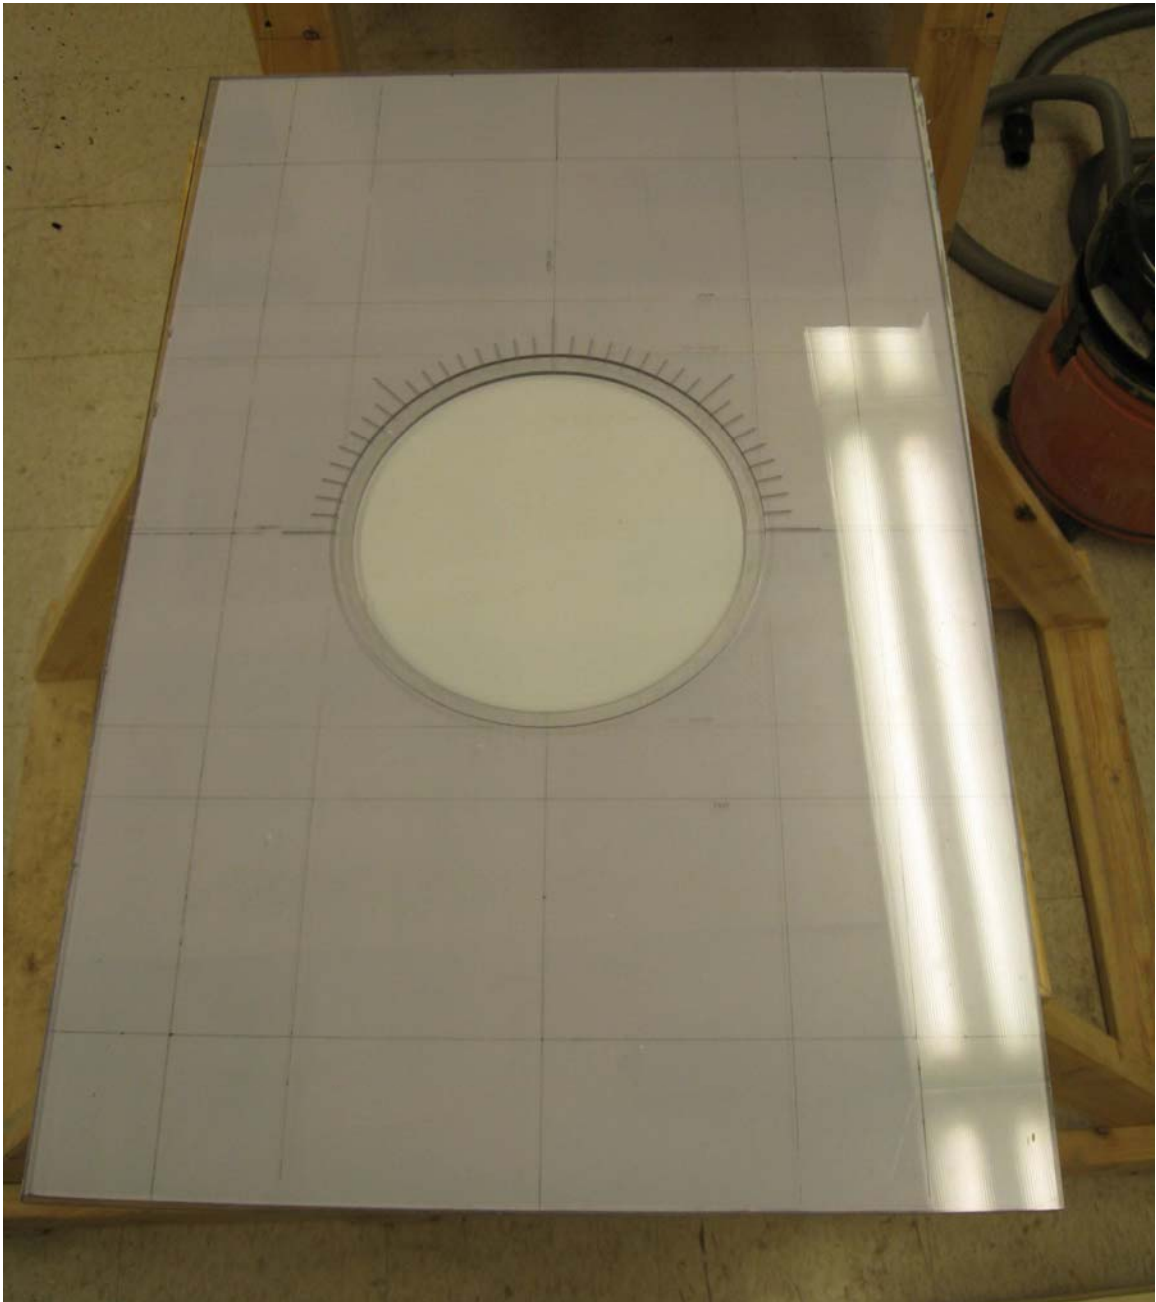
Test section bottom sheet: milled to contain a counter bore with a major diameter of twelve inches and a minor diameter of eleven inches into which an aluminum plate was placed.
